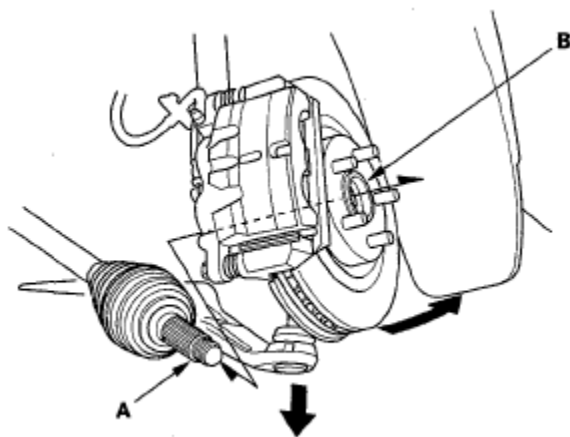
Identifying Outboard Joint Into Front Wheel Hub
